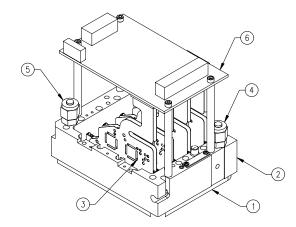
2.56 inch wide print swath assembly. 1: Nozzle / manifold assembly; 2:Supporting frame; 3:Twelve Jet modules; 4 Ink outlet; 5: Ink inlet; 6: Swath drive electronics interface board
